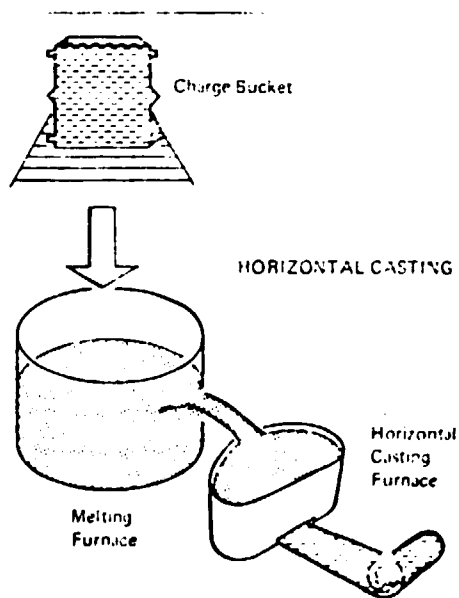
/b Schematic sketch of horizontal continuous casting and coiling of strip
